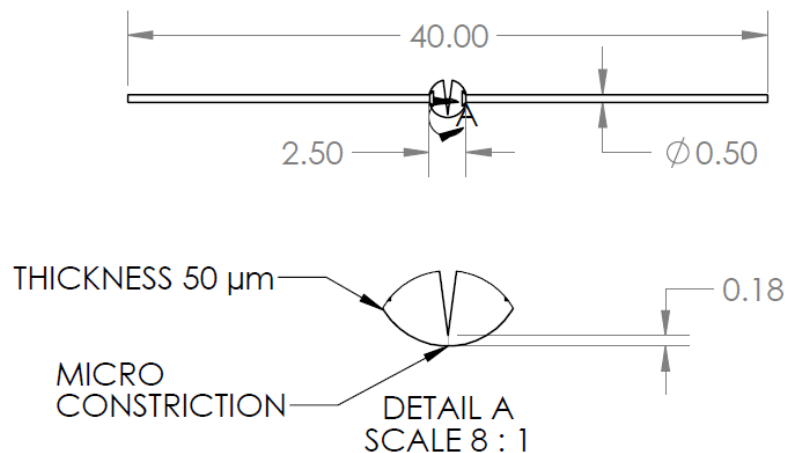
Design of constriction in wire sample [Dimensions in mm]
